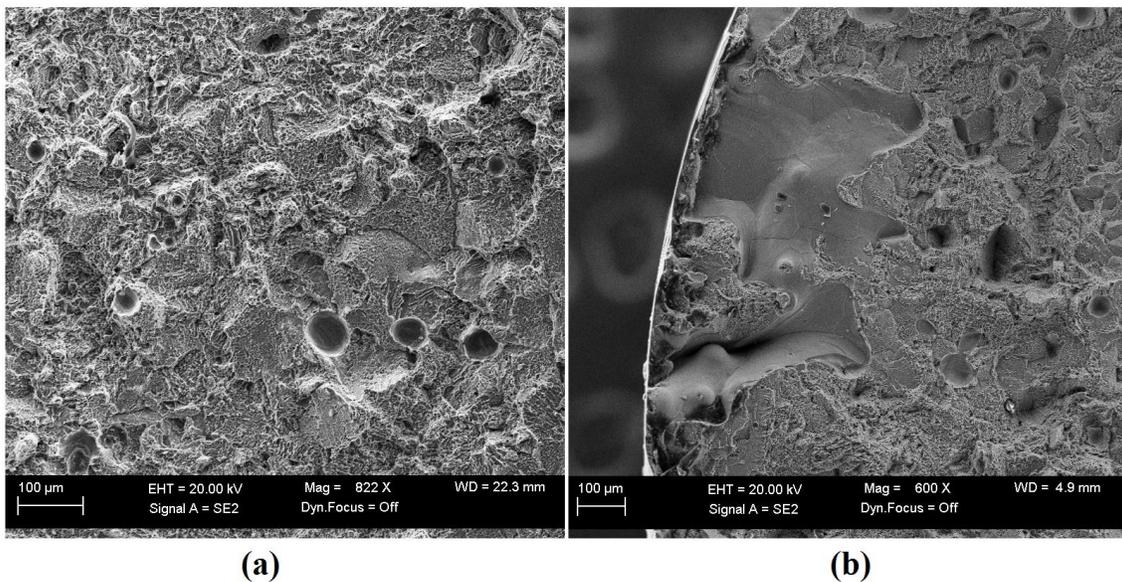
Pores from tensile fracture surfaces of (a) a single built LENS, and (b) a double built LENS Ti-6Al-4V specimen.
